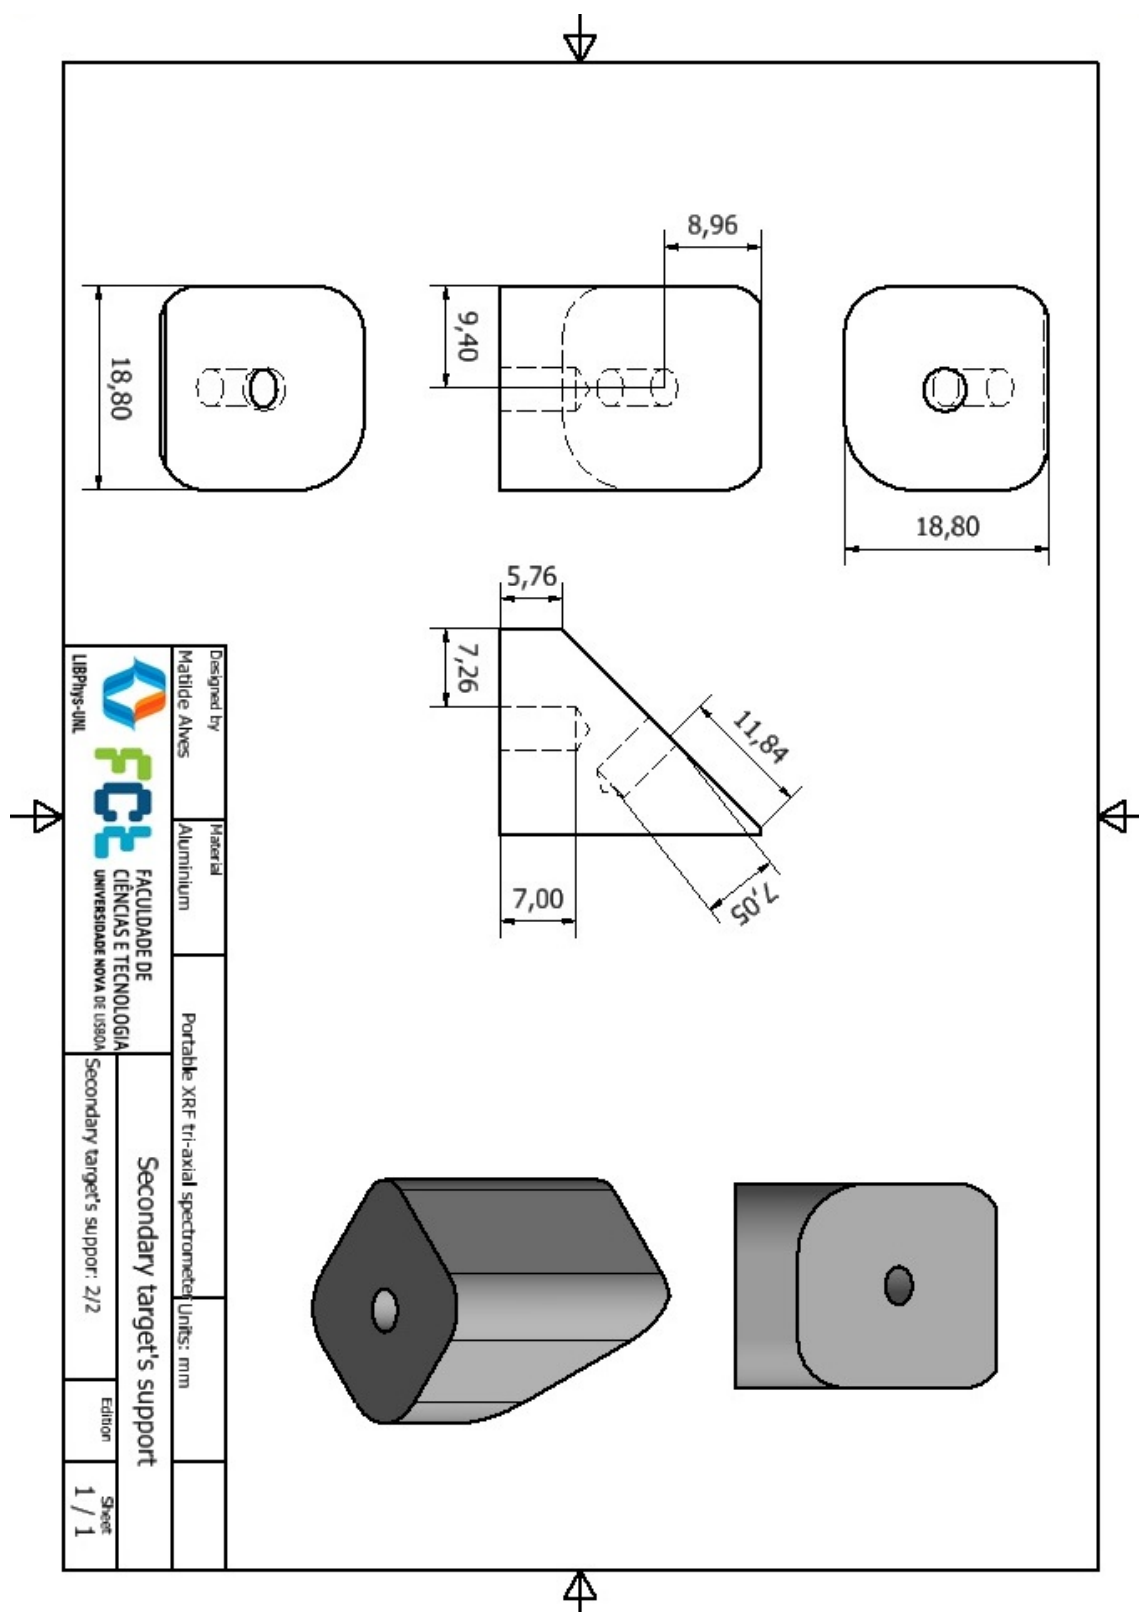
Secondary target's support 2/2 - Technical Drawing
